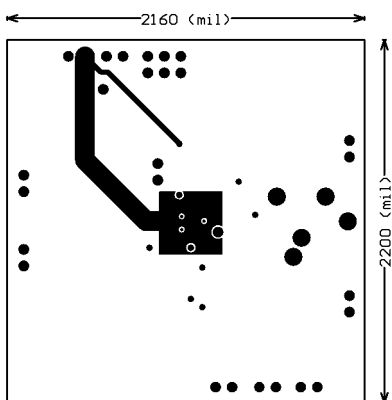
Recommended YZR PCB Layout: Mid Layer 2
